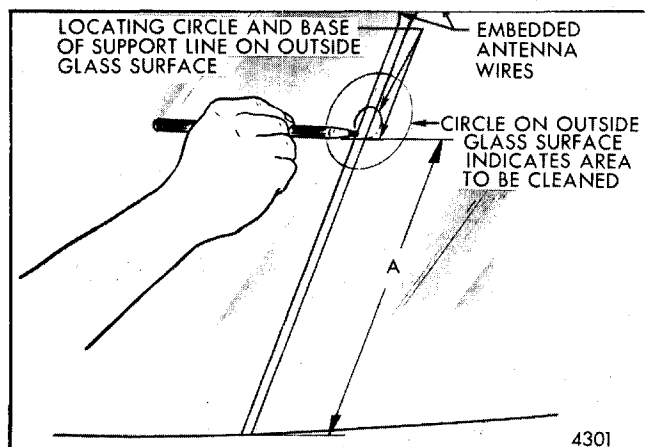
Locating Bonded Rear View Mirror Support on Glass
